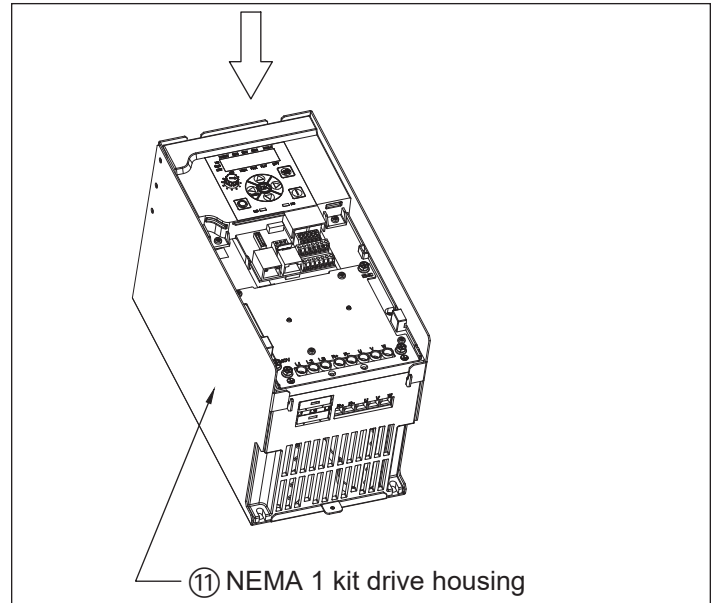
Inserting the drive into the NEMA 1 drive housing.
